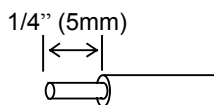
Wire Terminal on Option Connection Terminal Side.
